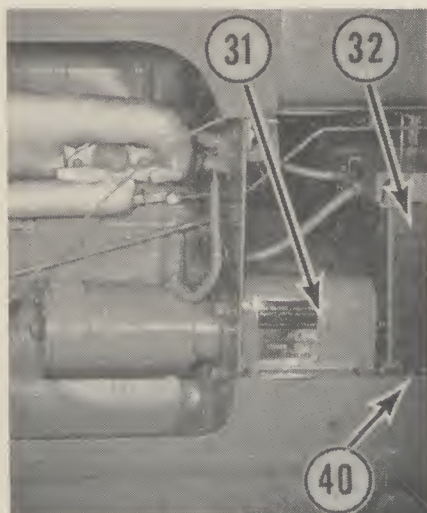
On tractors with 6 speed transmission access to clutch shaft coupling is by removal of battery, front cover (31) and flat dust cover (40).
